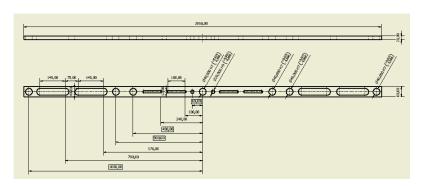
2nd design. Stainless steel lever arm design
